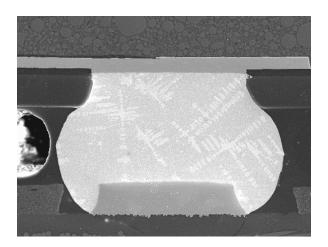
Cross Section of Solder Joint Showing Excellent Wetting with Ramp Profile.
